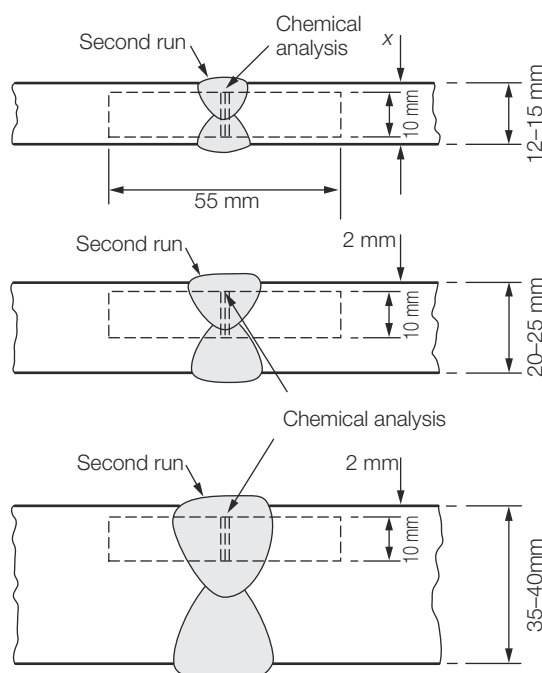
Butt weld test assembly (two-run technique): position of impact test specimens
